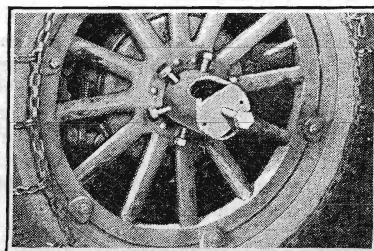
This homemade universal wheel puller will remove the rear wheel from a car of any make
